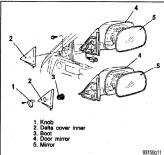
Outside door mirror mounting— 1994–98 Galant shown, others similar
